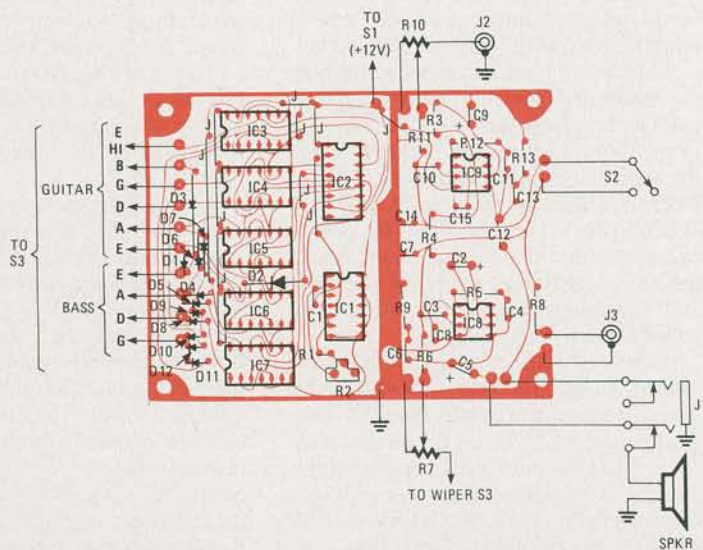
DO NOT FORGET to install the 11 jumper wires on the component side of the board.
